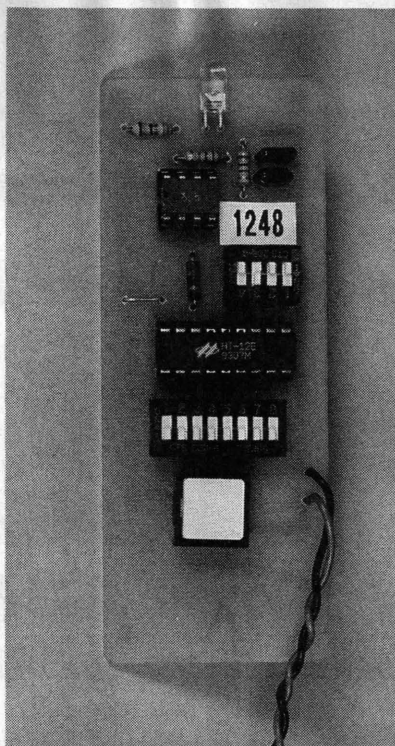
COMPLETED TRANSMITTER BOARD. This board allows unique coding that won't interfere with nearby remote-controlled equipment.
